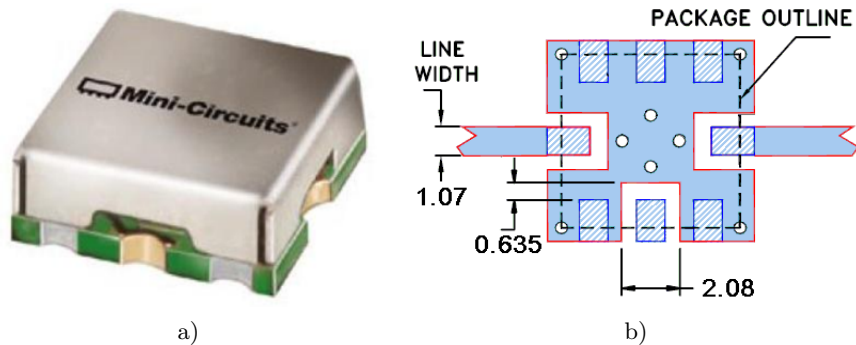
PCB-based package: (a) component view; (b) recommended footprint.
